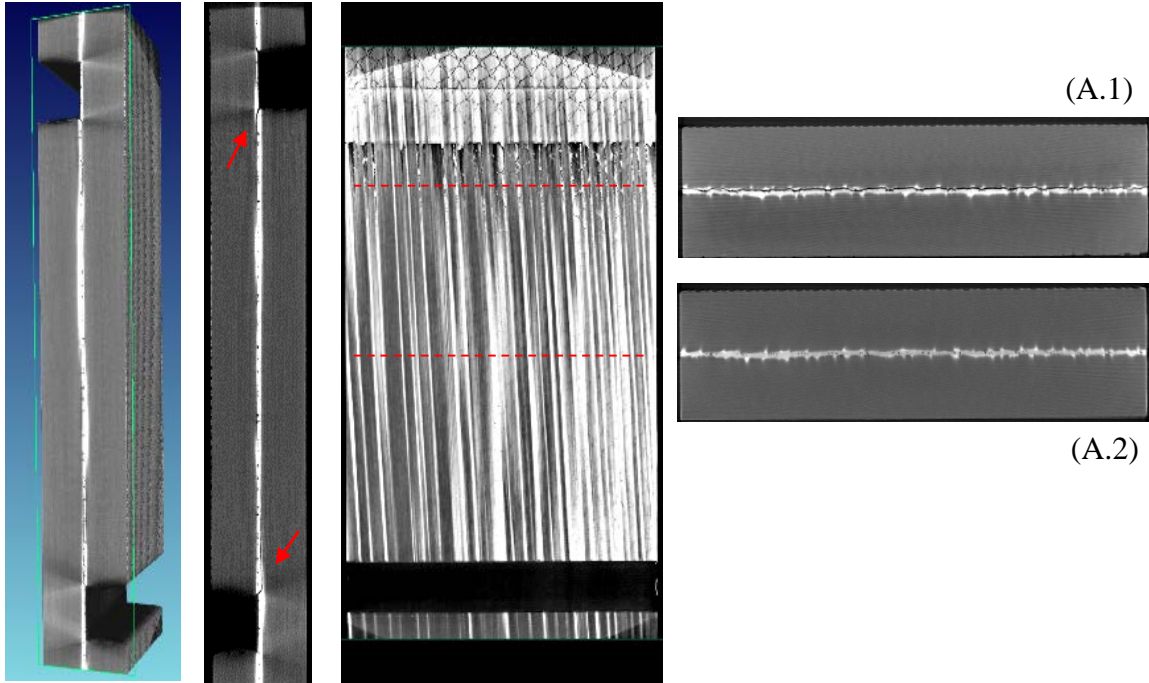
Full CT reconstruction of the TAI8-8 specimen. From left to right: 3D view, side section slice, in-plane section slice, and top section slices corresponding to the dotted line A.1 and A.2. The crack can be clearly seen in the top cross-section and is not present in the bottom one. Crack locations are identified in the side view by the red arrows.
